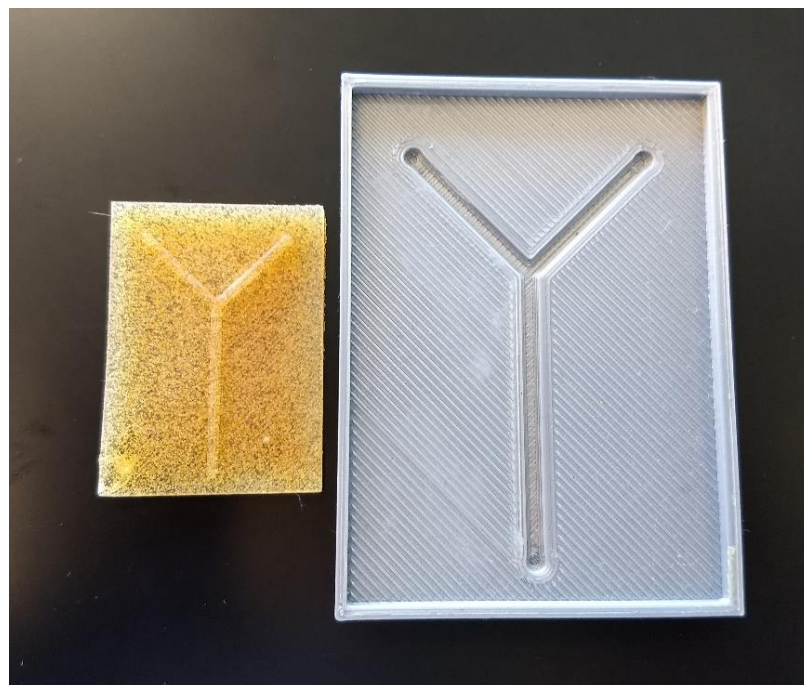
Photograph of the 3D printed Y junction chip and its shrunken PU positive mold.
